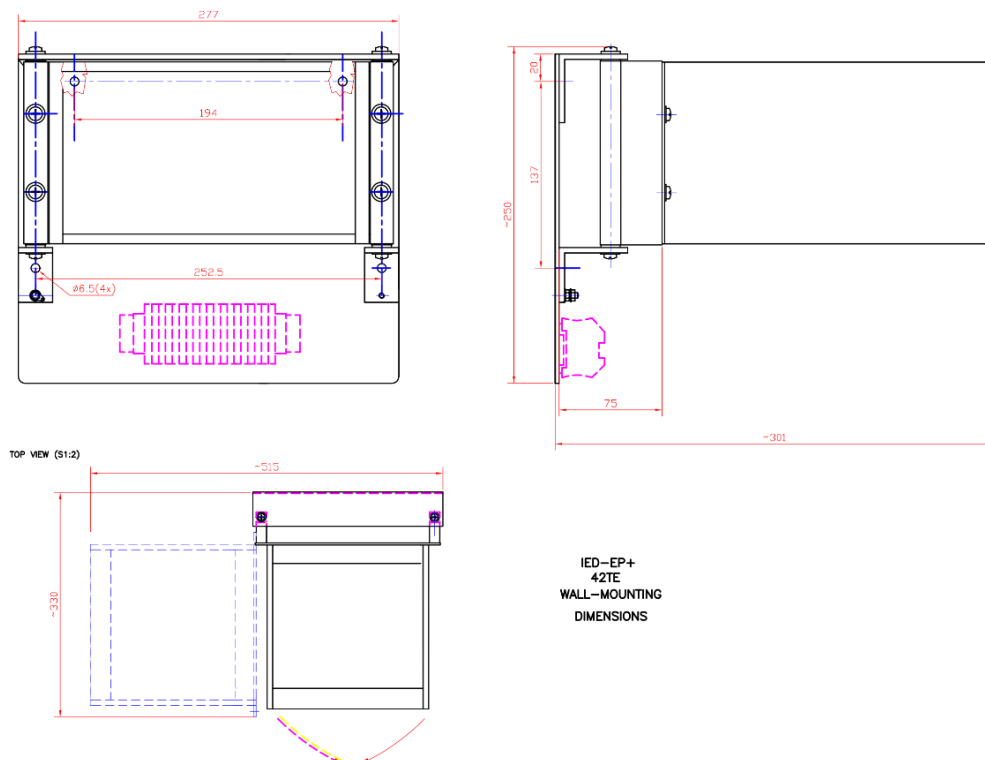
Dimensions for wall mounting of 42 HP devices (lower terminal only)
